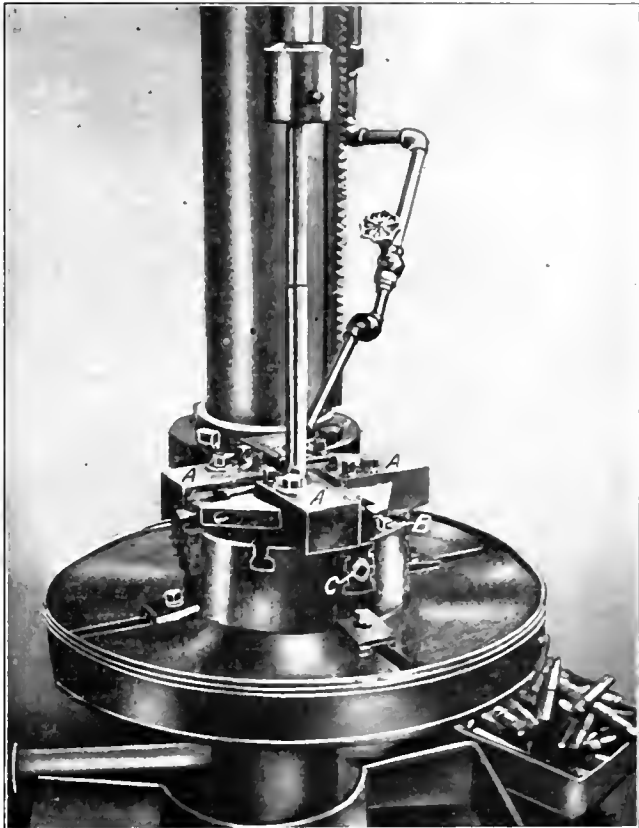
Upright Tap-threading Machine used for Threading Stay-bolt Taps.
